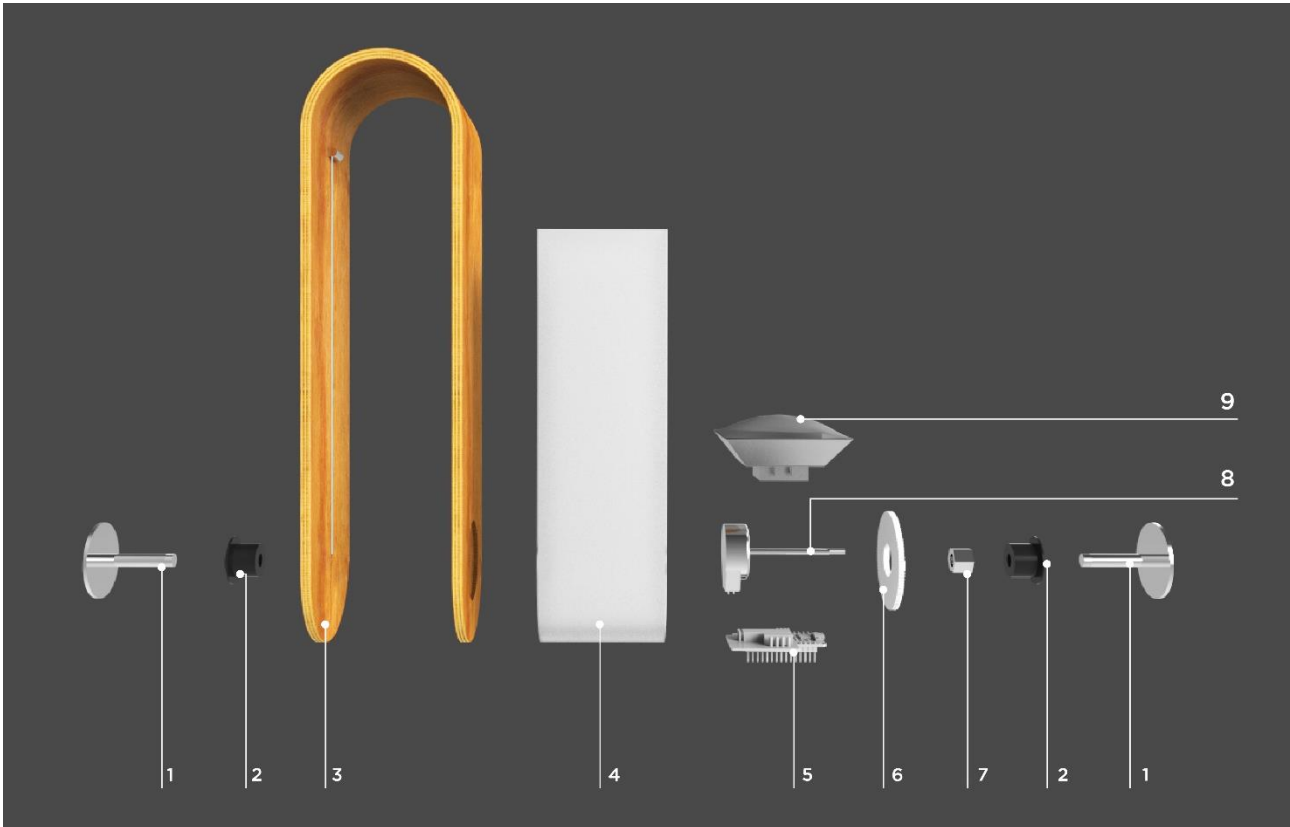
Exploded view of daylight mimic luminaire: (1) screw; (2) rotating electrical connector; (3) plywood "U" support; (4) translucent polycarbonate housing; (5) Arduino IoT and stepper motor driver; (6) gear; (7) double nut; (8) motor rotation; (9) optical system: reflector and lens.
